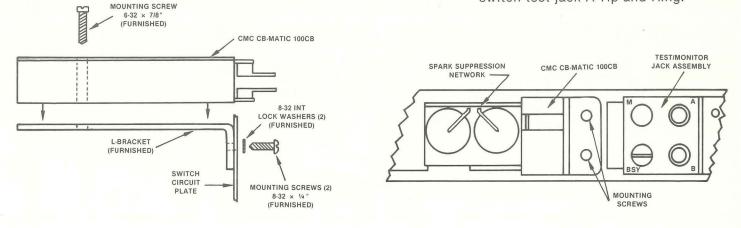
Mounting Solid-State "CB" Relay on the Switch Circuit Plate.
